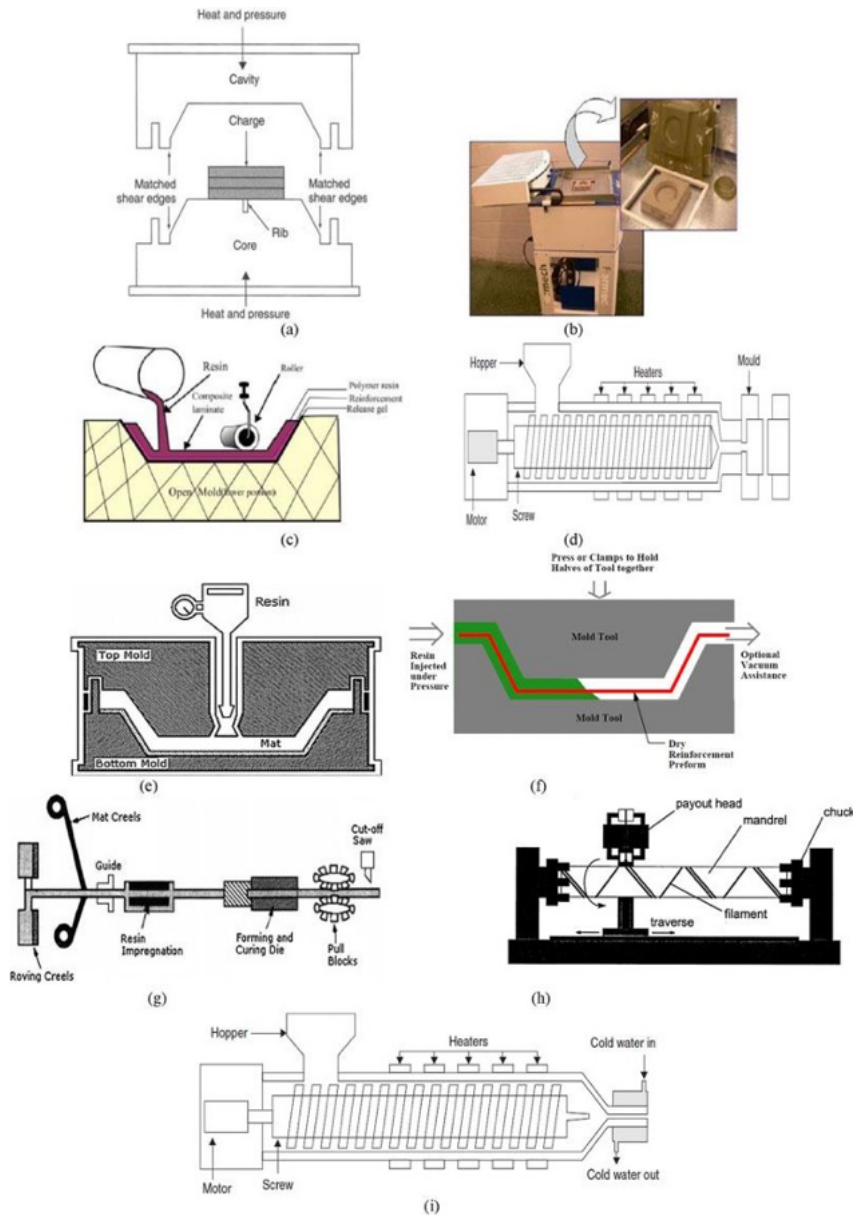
Manufacturing processes [3]: (a) compression molding; (b) thermoforming process; (c) hand layup process; (d) injection molding process; (e) resin transfer process; (f) vacuum-assisted resin transfer process; (g) pultrusion process; (h) filament winding; (i) extrusion process.
